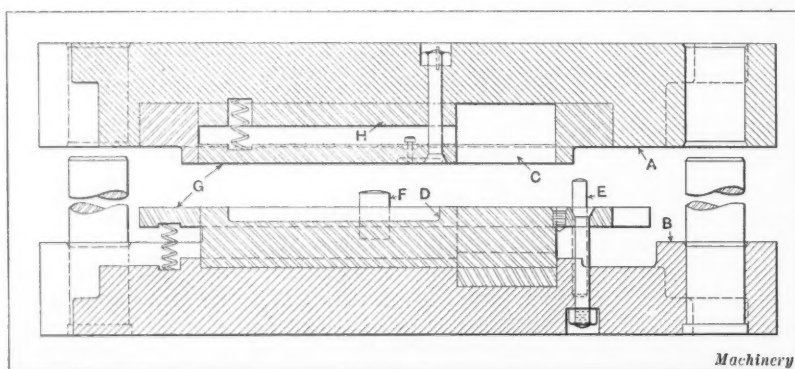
Design of Sub-press Dies in which Stampings for Large Motors are made
